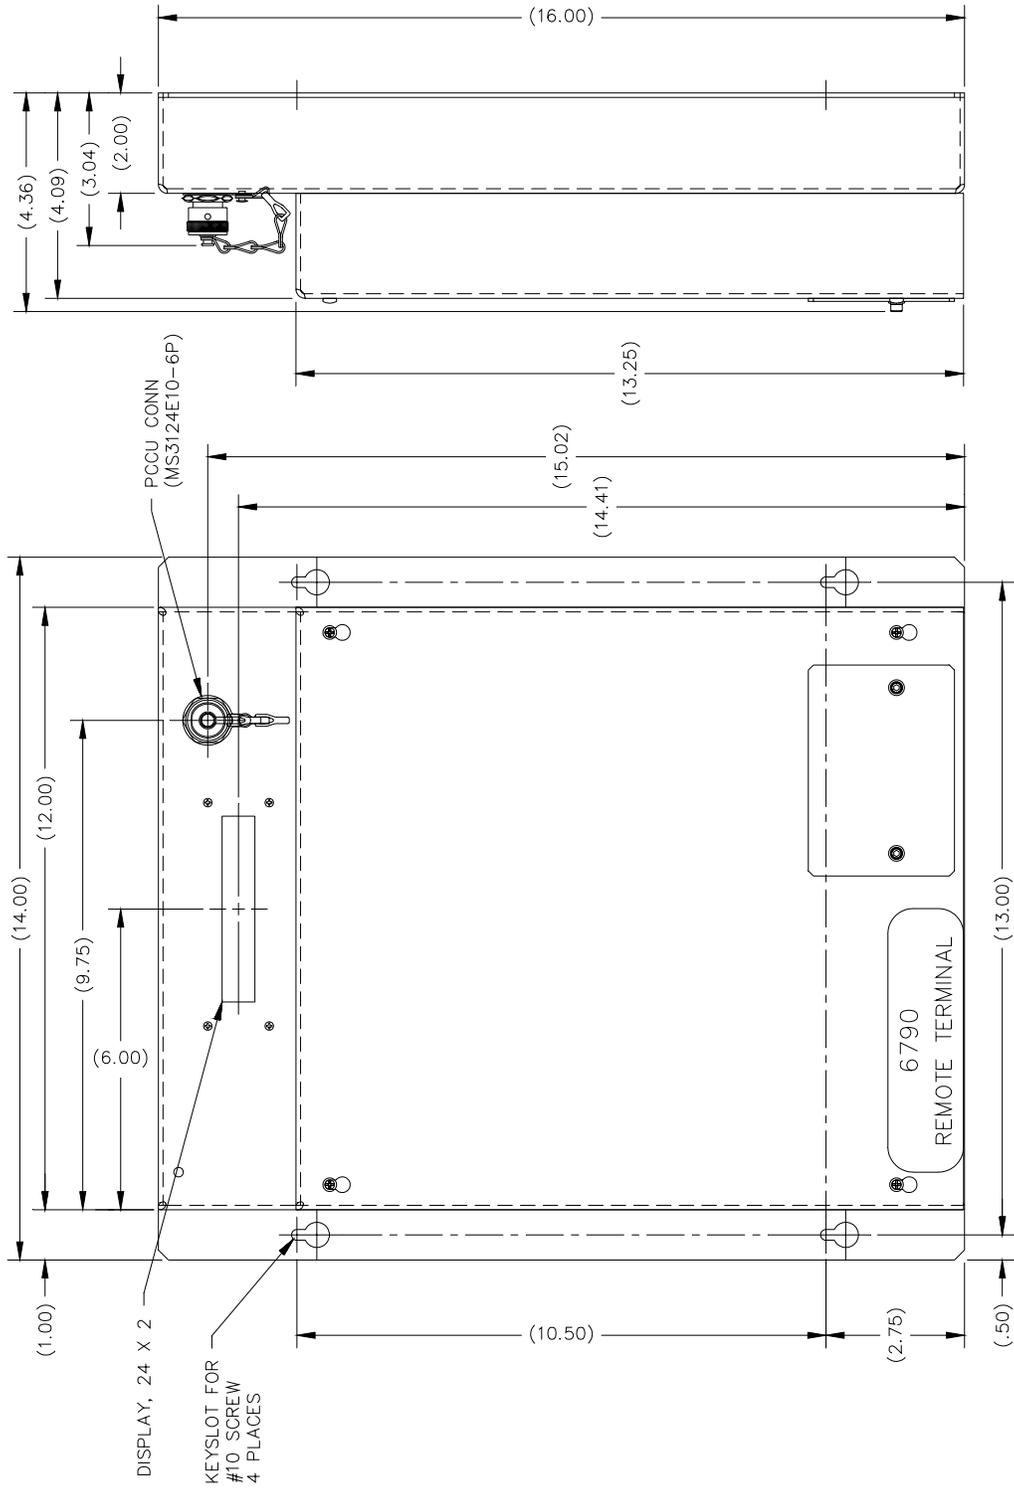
5 Wall-Mount Enclosure Outline Drawing, Model 6790A RTU
